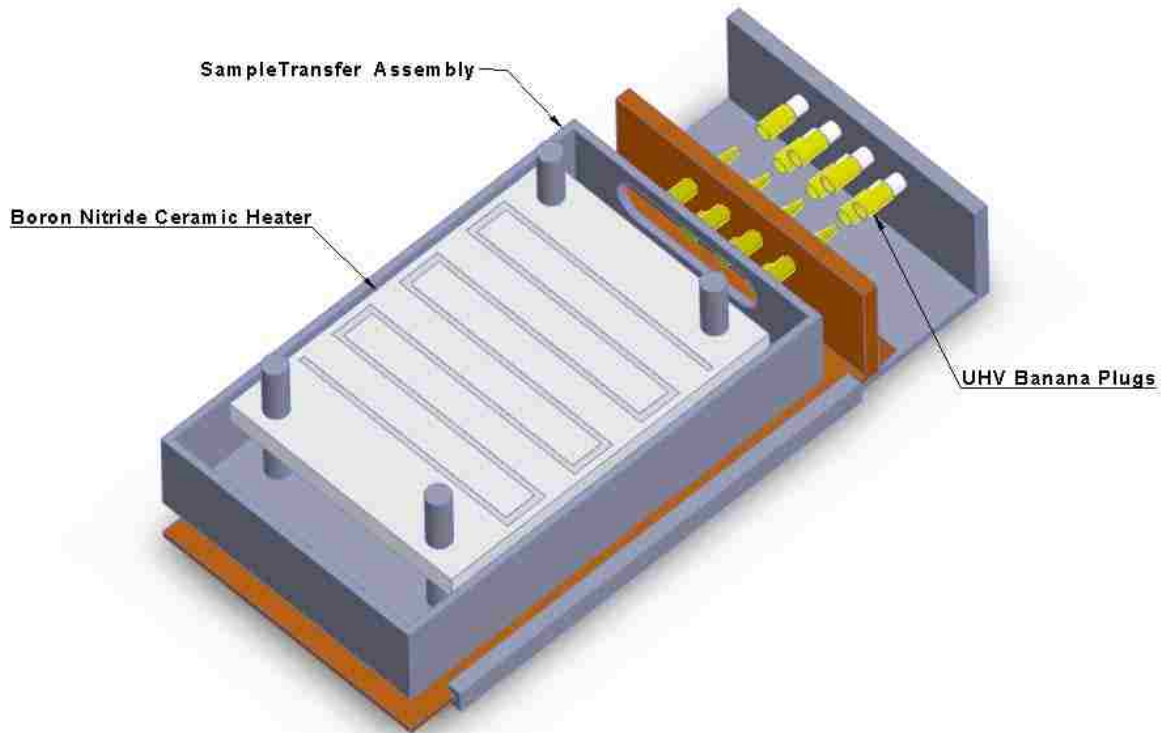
Schematic of the substrate heater assembly utilizing ultra-high vacuum compatible banana plugs for electrical connections.
